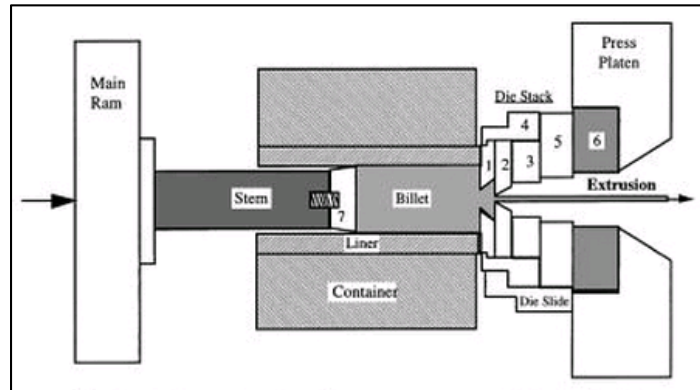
Schematic drawing of a typical direct extrusion press (reproduced from [4])
